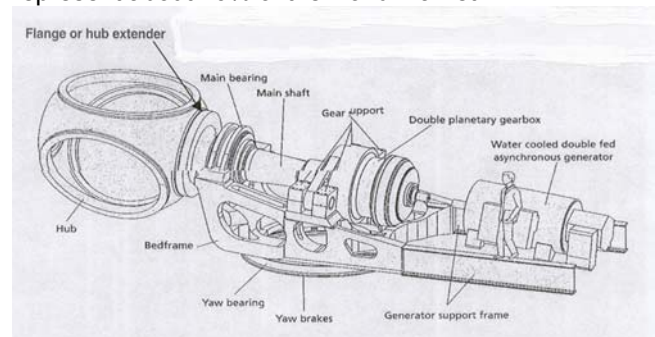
Cross Section of a Wind Mill Unit with a Gear Box.
